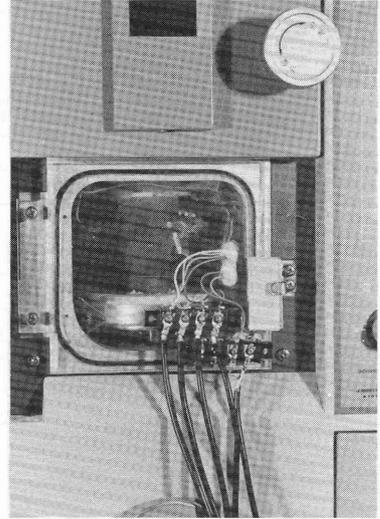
The lead wires from the casting room (pressure-differential casting unit)
